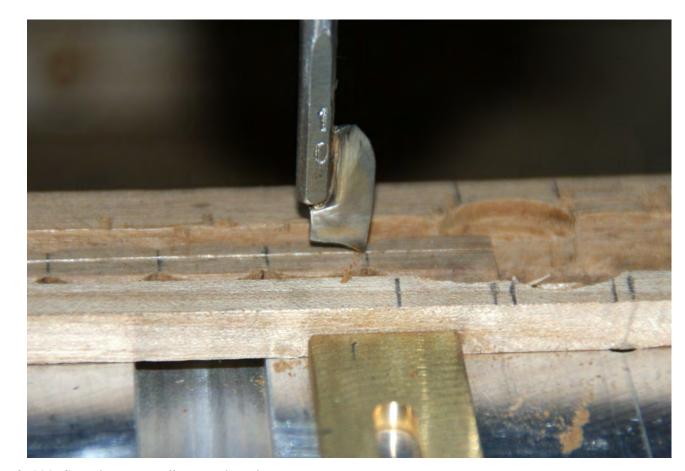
Step three: rounding out the other two parts of the block, using my tool n°. 2.
